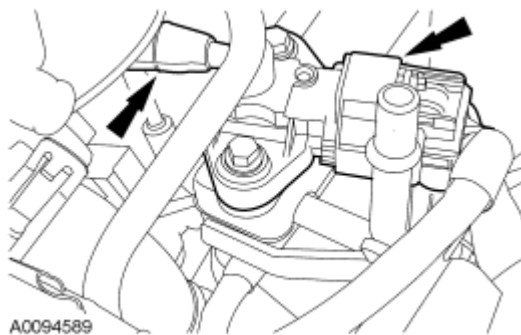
Locating Fuel Rail Pressure, Temperature Sensor Vacuum Tube & Electrical Connector
